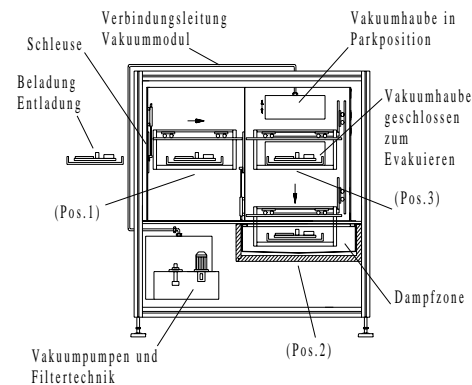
General sketch of vacuum- soldering machine (Batch type)
